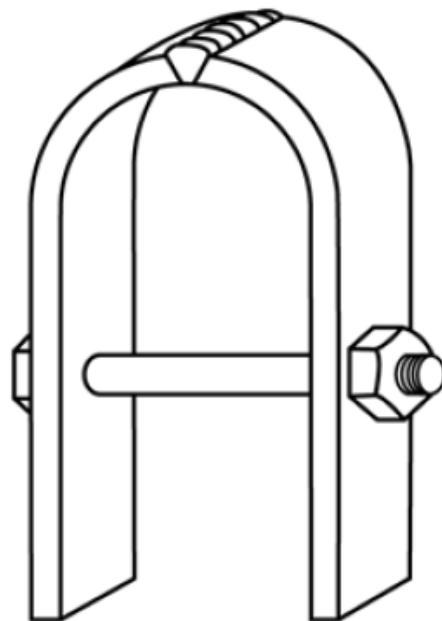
Welded U-bend Sample Configuration [29]
